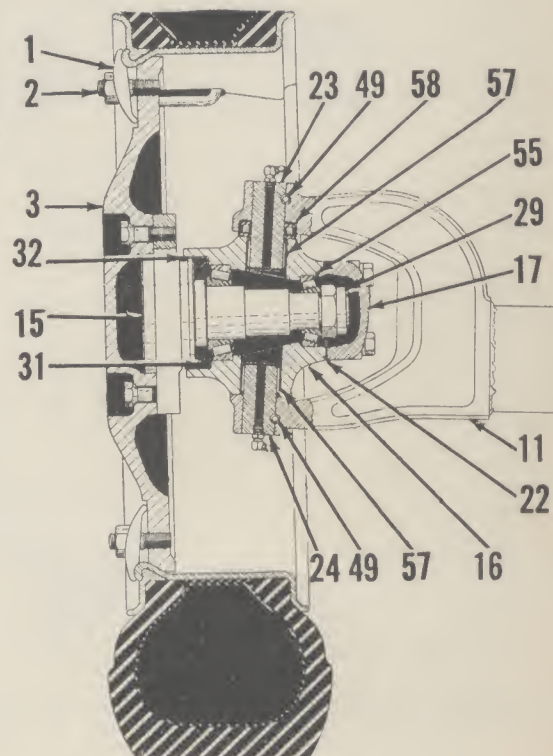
Center point easy steering is obtained by this "live" type wheel spindle and carrier. Refer to Fig. 0454 for details.
